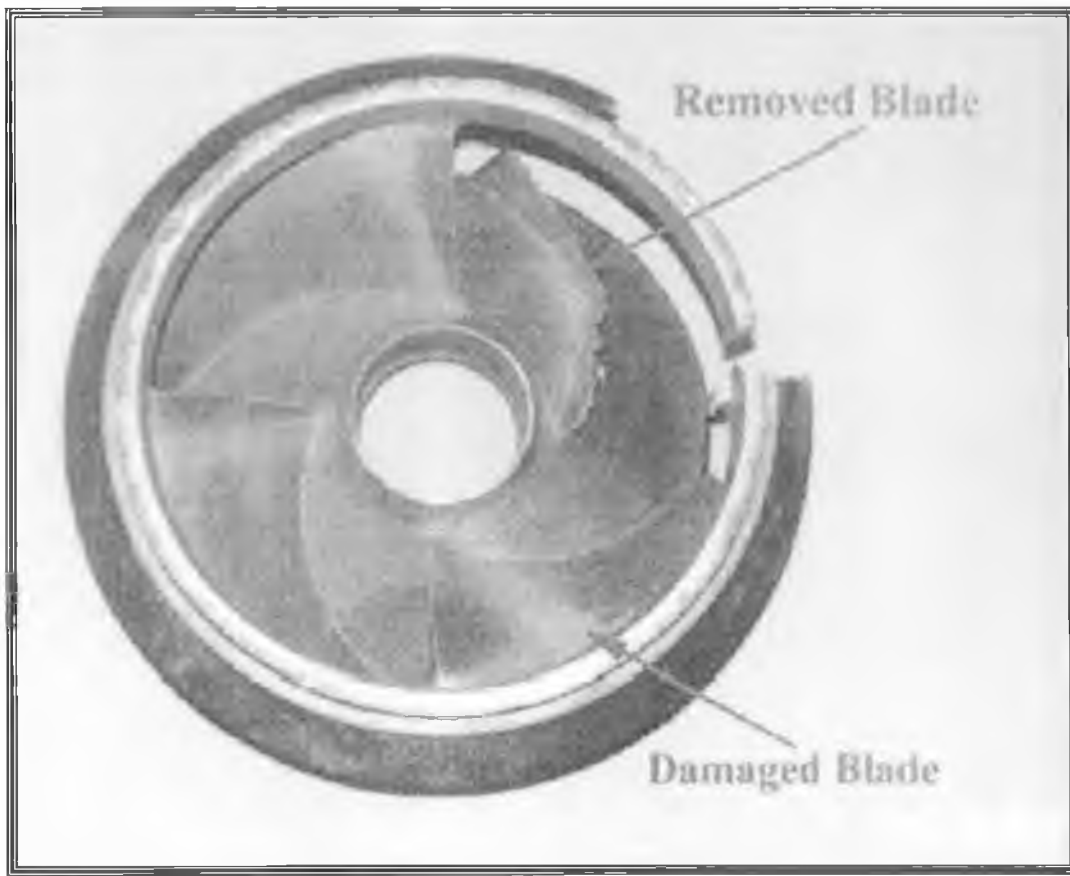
Industrial pump impeller subjected to impact (erosion-corrosion) wear, [31].
